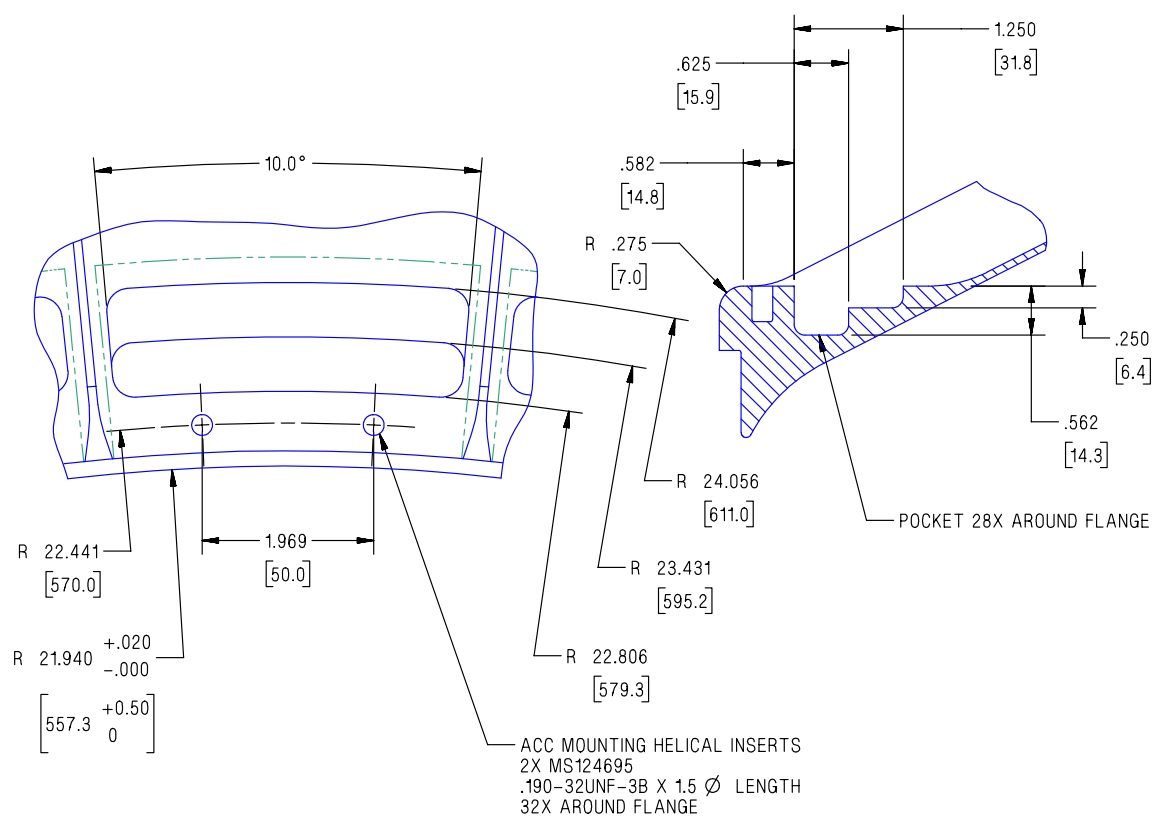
Tracker Mounting Cross-Section
